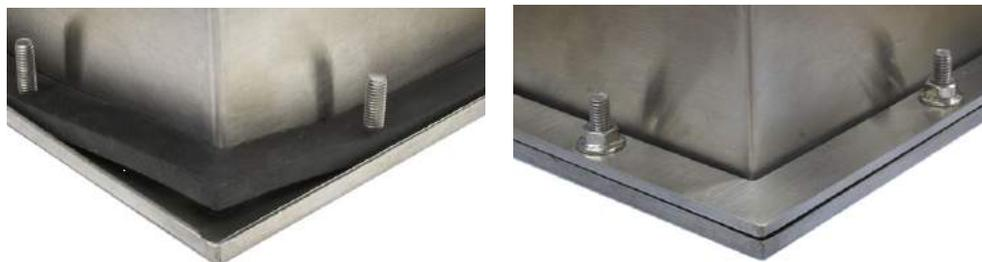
Gasket on Enclosure (left) and Backing Plate Installed (right)
